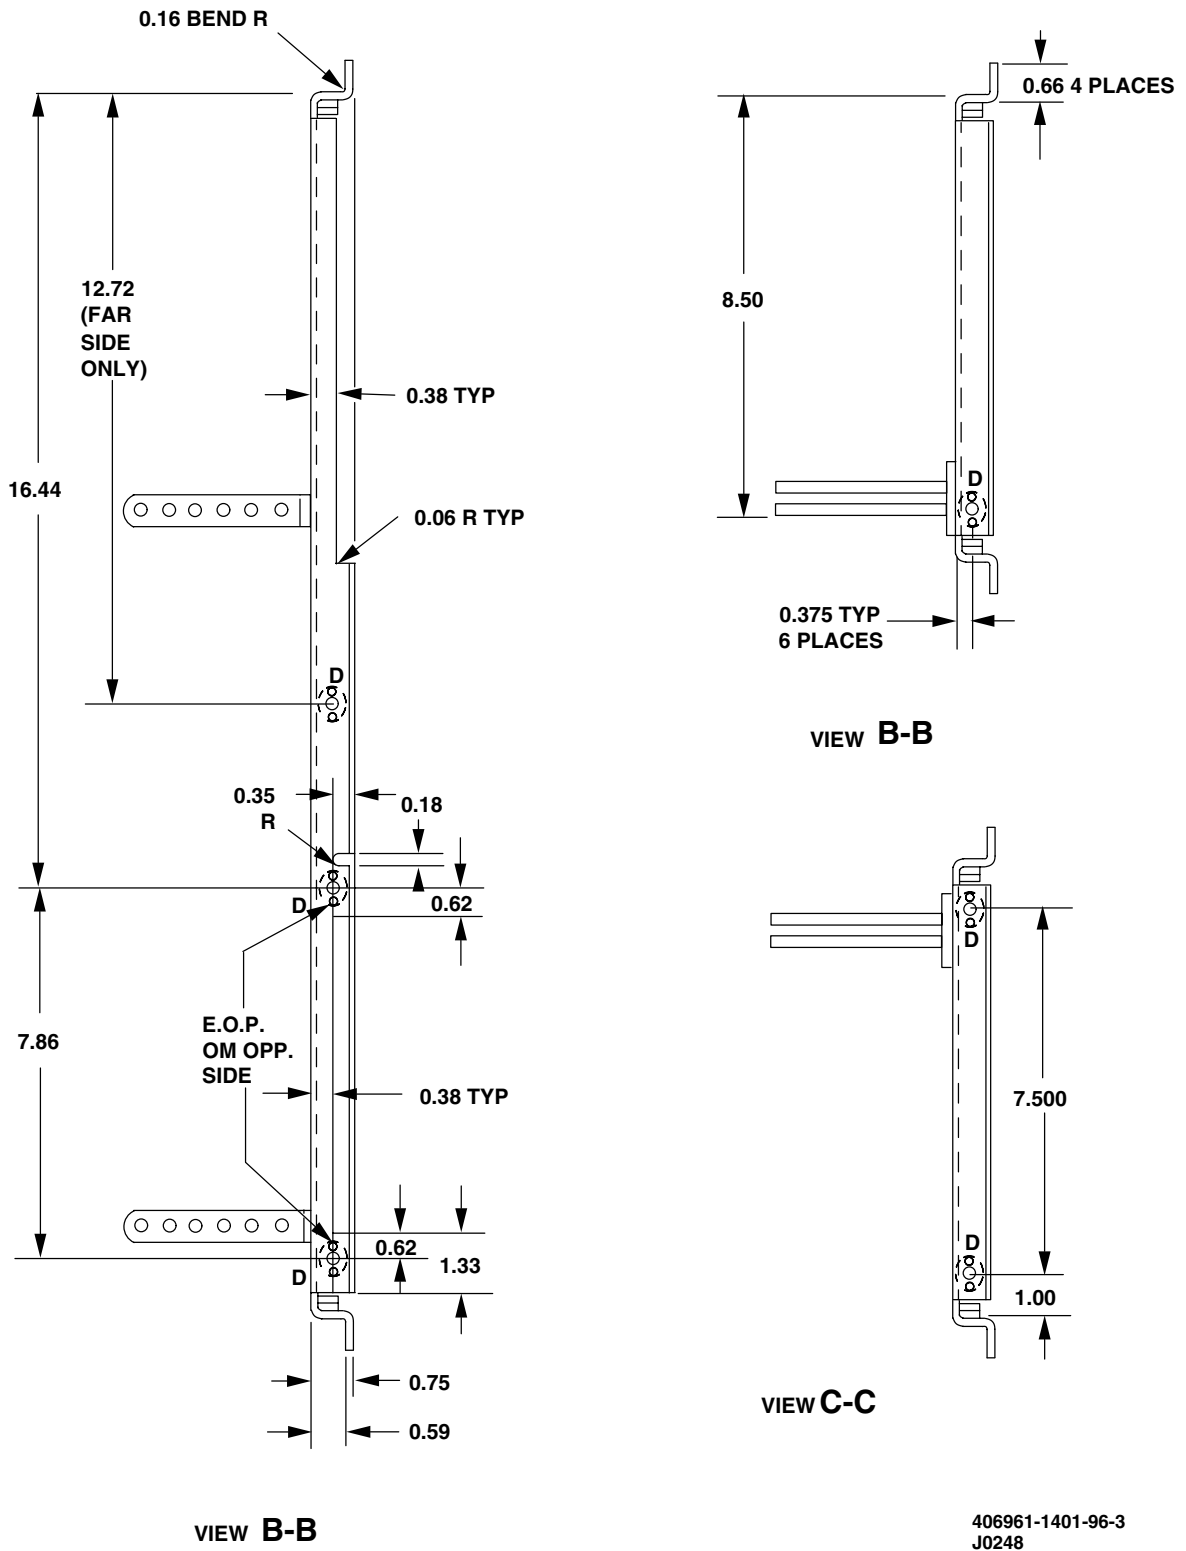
Bracket, Mounting (Sheet 3 of 4)
